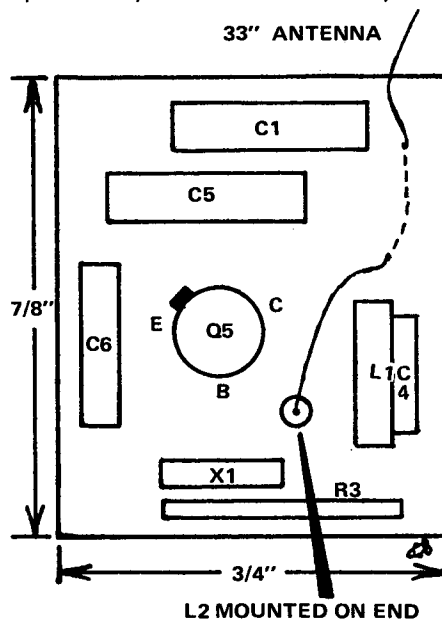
SUGGESTED PARTS LAY-OUT. Note that the antenna wire is looped through holes in the board to prevent strain on L2. The entire Minimitter is built on a 7/8" by 3/4" piece of vector board.
